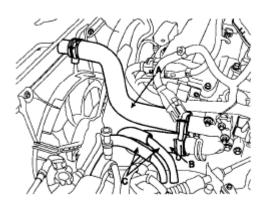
Identifying Fan Motor Connector (1 Of 2) Courtesy of HYUNDAI MOTOR CO.
